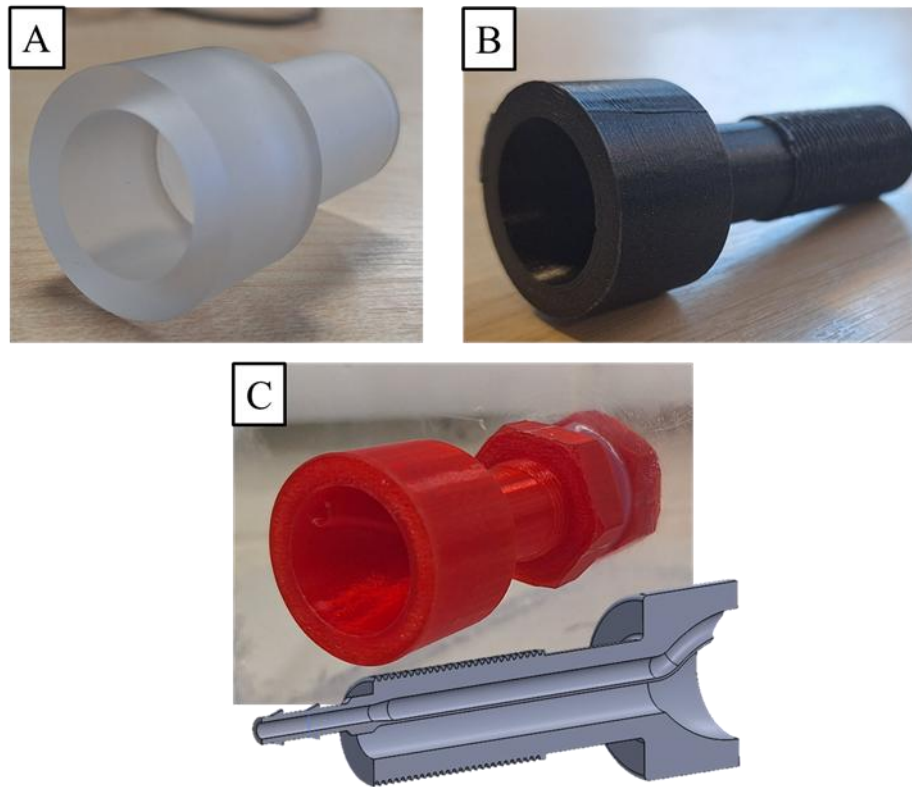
(a) First polycarbonate tube prototype; (b) second prototype in PLA with threaded body; (c) final specimen holder and its design cross-section.
